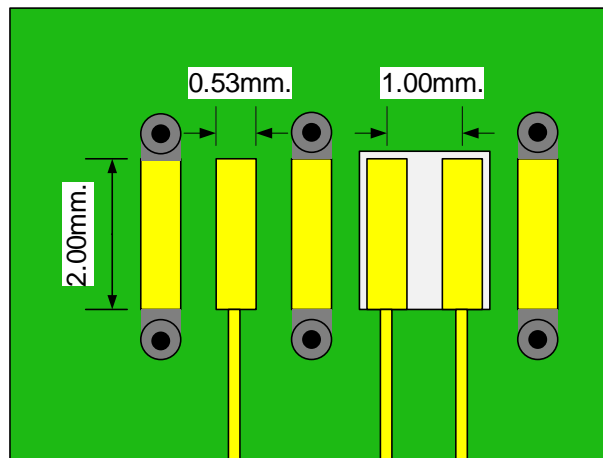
System Board PCI Express Connector SMT Footprint, Highlighting Pad Size and Pin Pitch
